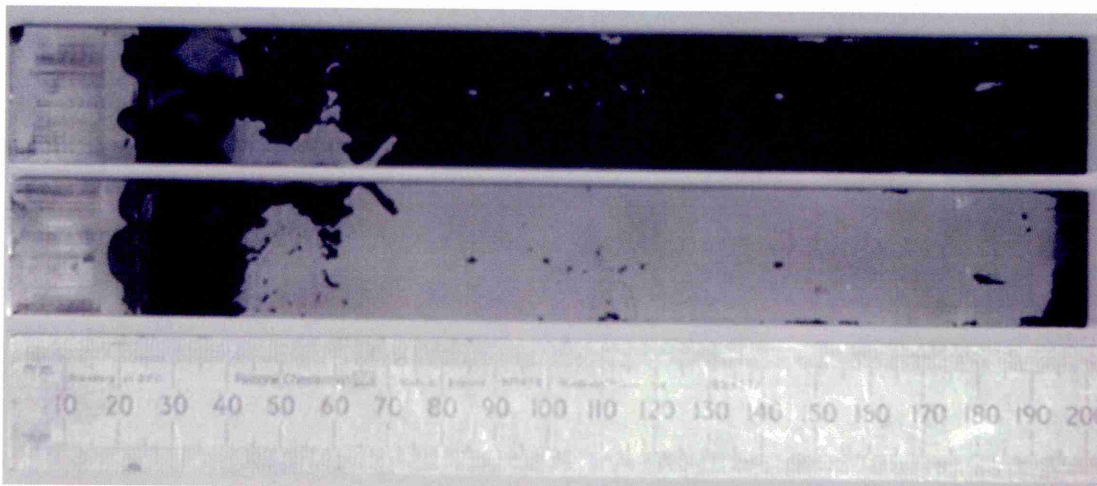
Alumina grit blast + primer fractured wedge test specimen
